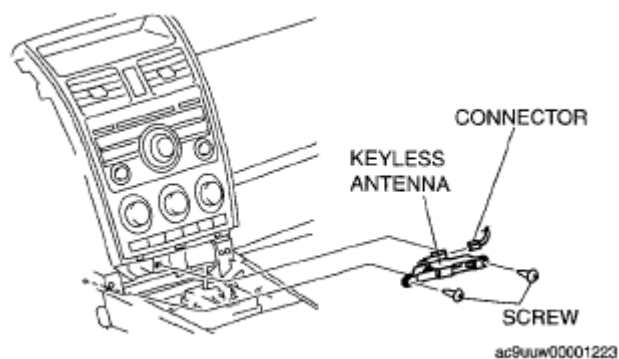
Identifying Keyless Antenna & Connector With Screw (Interior, Front)
